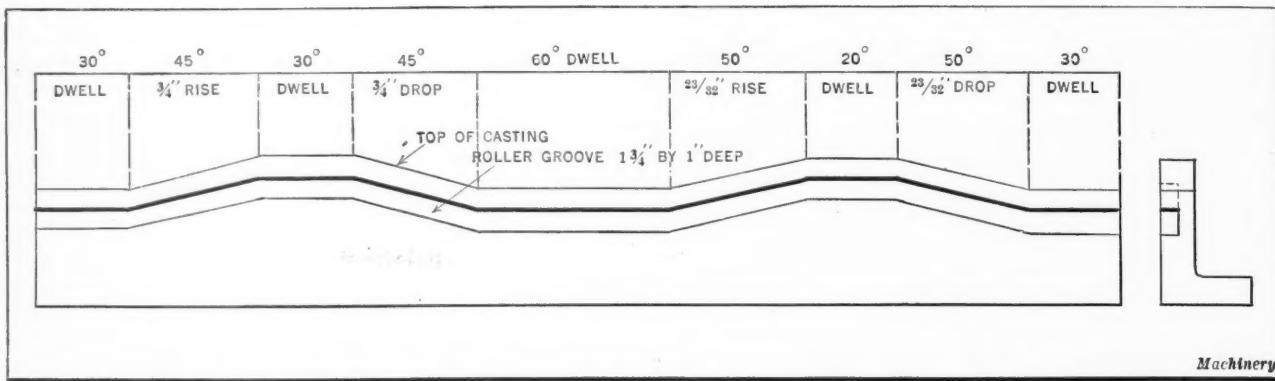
Lay-out for Large Cam, which was cut on a 48-inch Boring Mill
